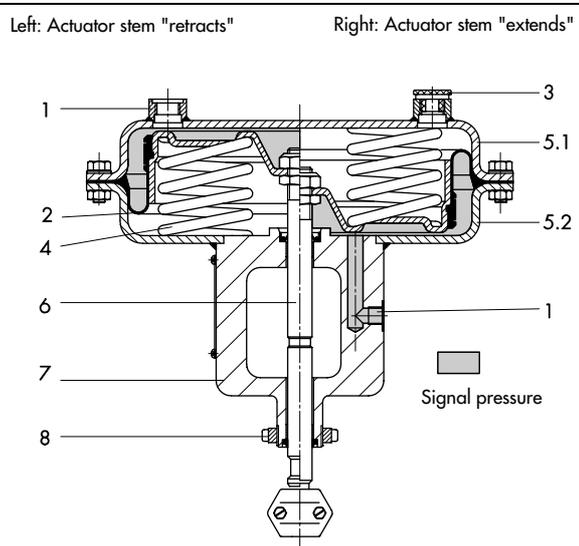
· Sectional view of Type 3277 Pneumatic Actuator
